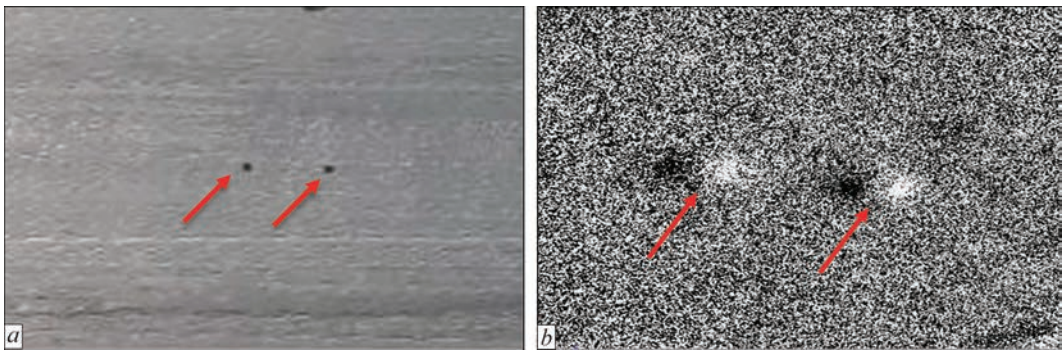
Shearography inspection of the test area of a weld of an aluminium specimen: general view of the area with defects (a) and a typical pattern of detected defects with a diameter of 0.3 mm and a depth of $L = 0.35$ and 0.85 mm (b)
